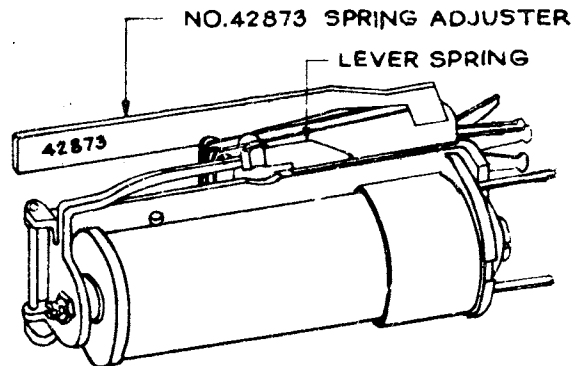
ADJUSTING LEVER SPRINGS FOR
